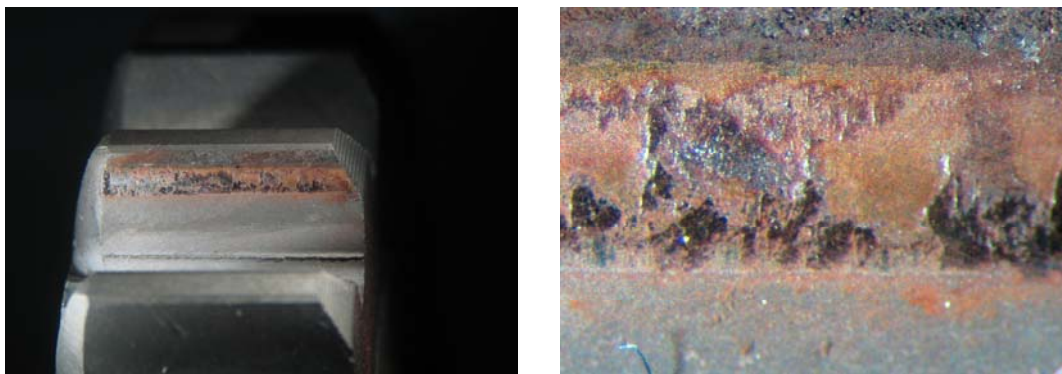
Appearance of the contact area of a CrN-coated steel spur gear tested under contact fatigue [3.51].
